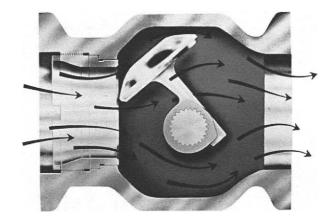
Eccentric rotating plug valve Courtesy of Tyco Flow Control
